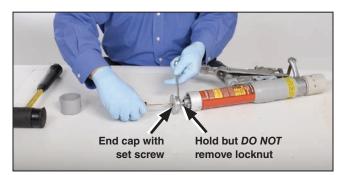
Hold the locknut steady and loosen and remove the set screw.
